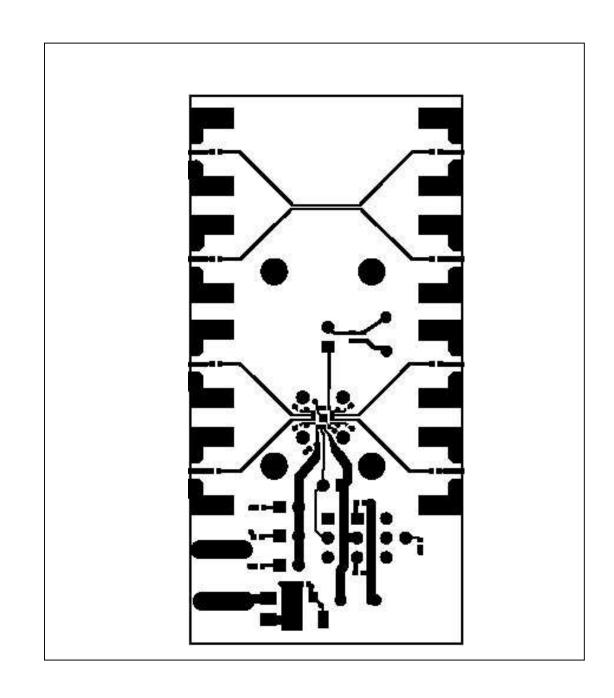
MAX3746 EV Kit PC Board Layout – Component Side (2X)
